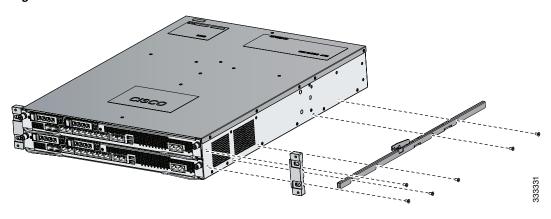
shows all of the brackets that can be removed for the fixed rack mount.
